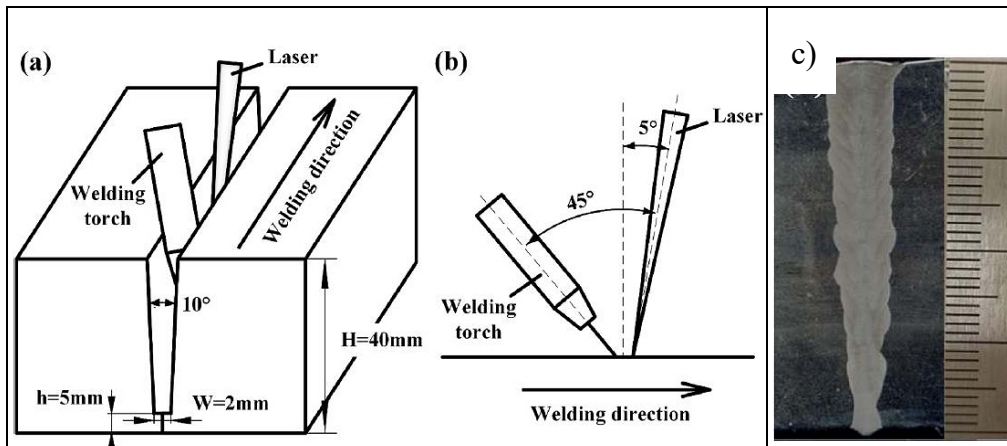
(a) Schematic presentation of groove configuration and the set-up of laser beam and arc torch arrangements used in the multi-pass laser-arc hybrid welding of 40 mm thick type 316 L austenitic stainless steel plates; (b) resultant multi-pass weld cross-section with a root pass and 13 filling passes. (Zhang et al., 2018)
